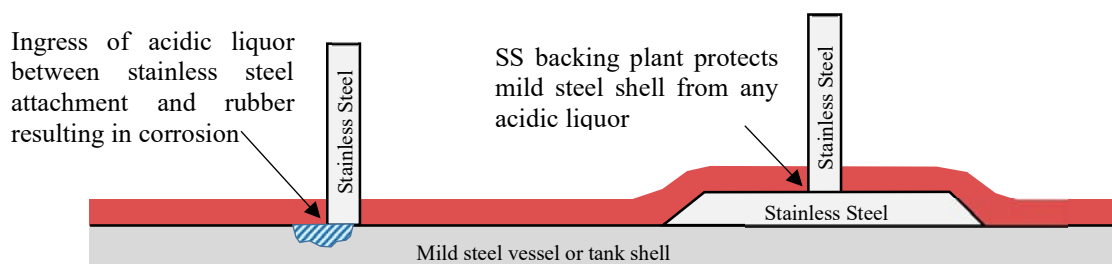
Stainless steel attachment (left), and with backing plate (right).
